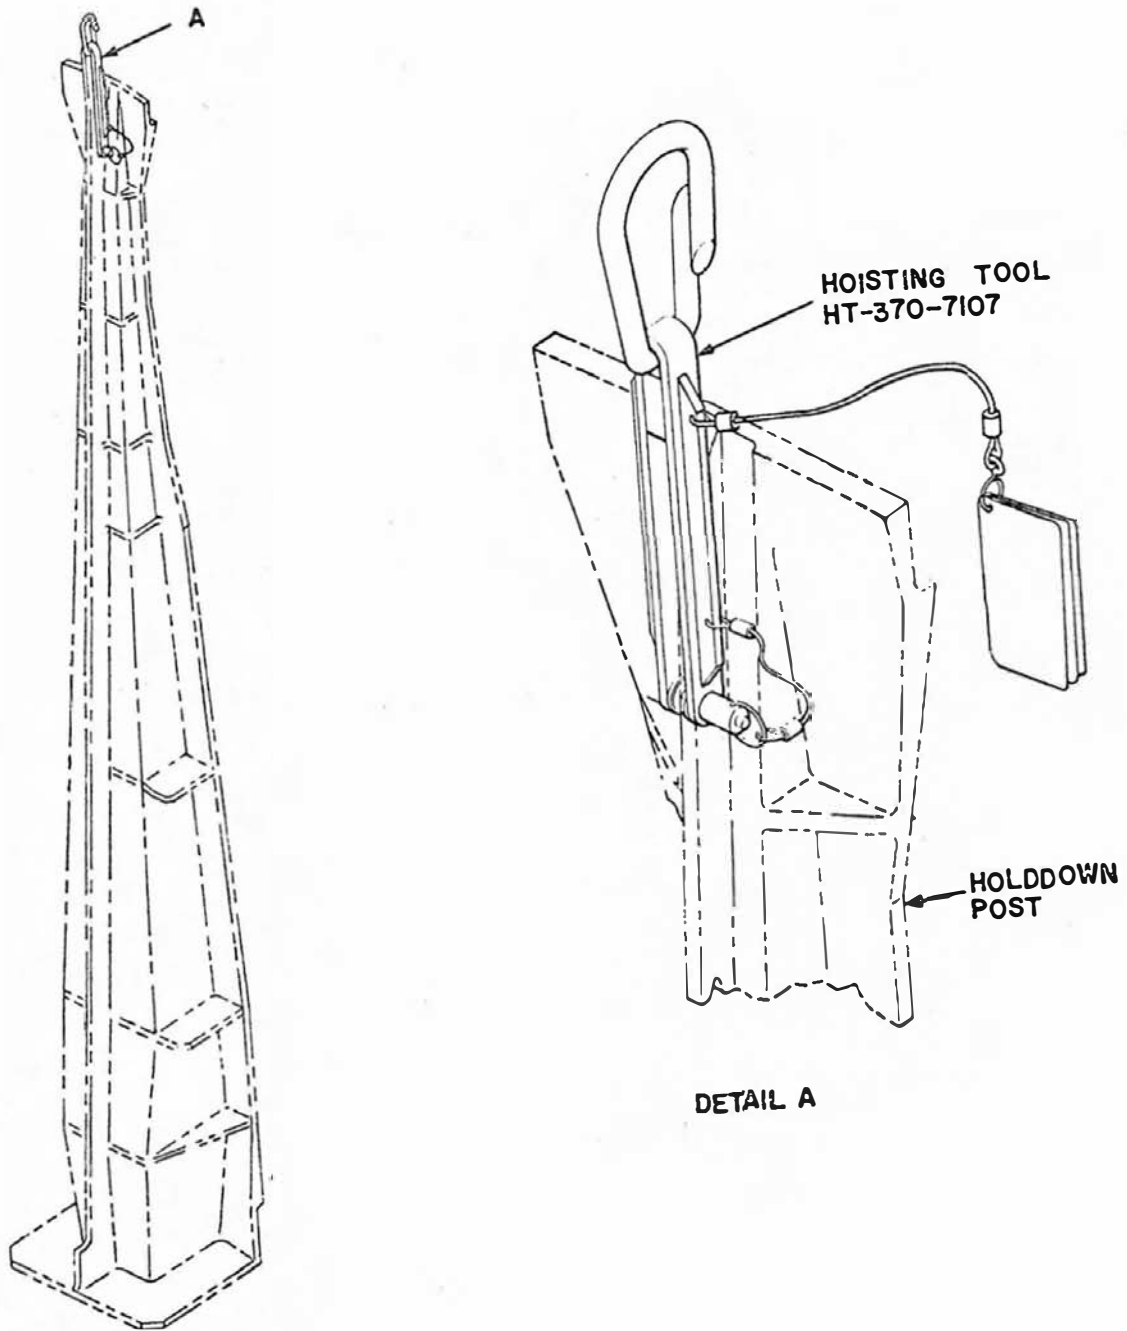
Holddown Post Hoisting Tool HT-370-7107
